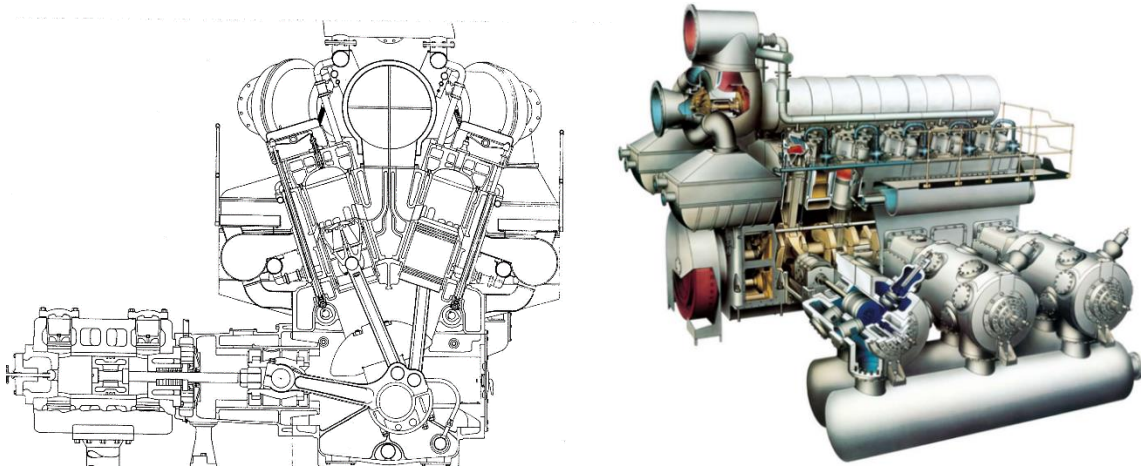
Cross-section and isometric views of an integral compressor engine. Reprinted from [12].
